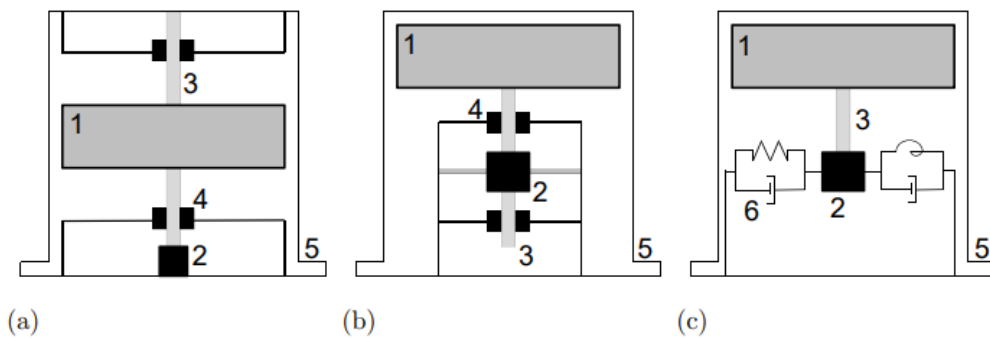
Sketch of a Reaction Wheel Assembly [2].
